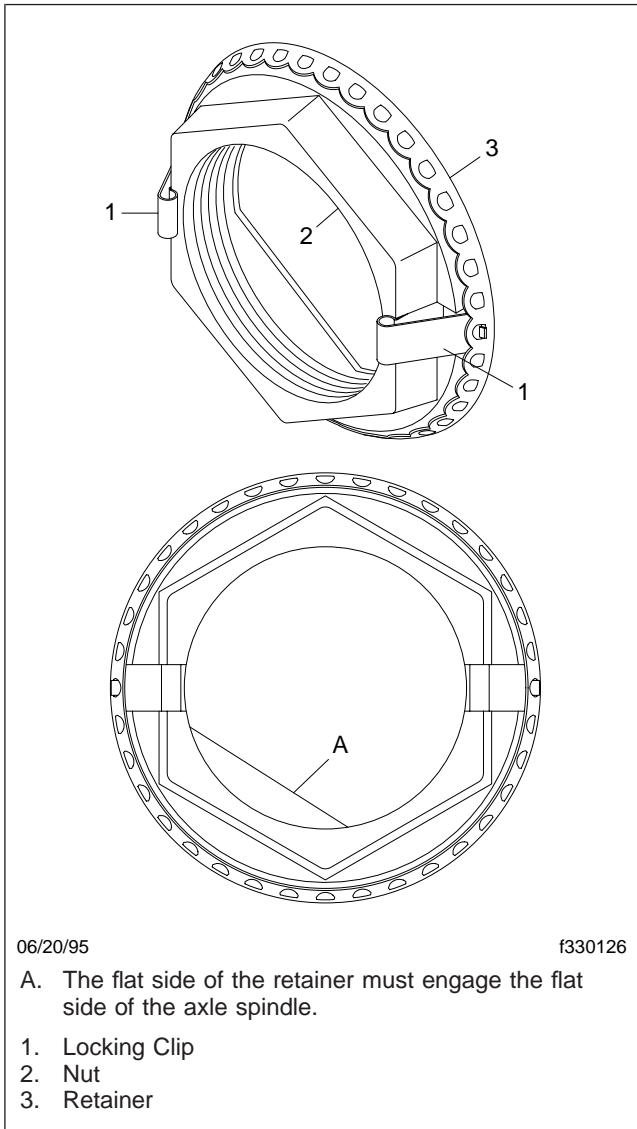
, Axilok Retaining Nut, Meritor Front Axle
